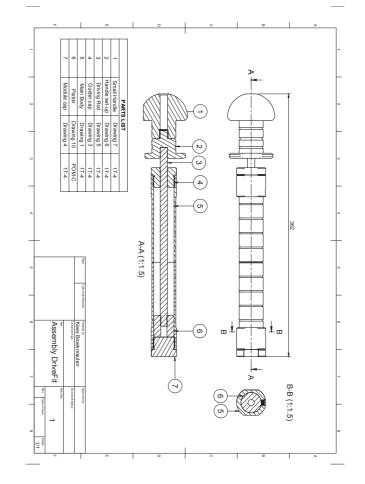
Assembly drawing of the Final design (Appendix A.FIX)
